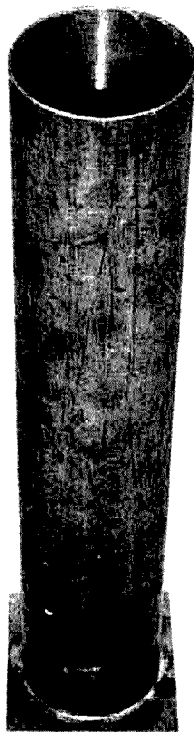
One of the six main copper tubes silver soldered to the bottom cover plate.
